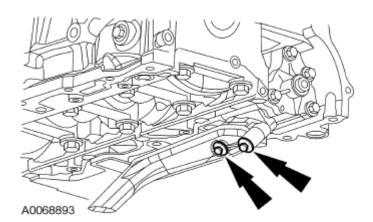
Removing Bolts And Rear Crankshaft Seal Courtesy of FORD MOTOR CO.
